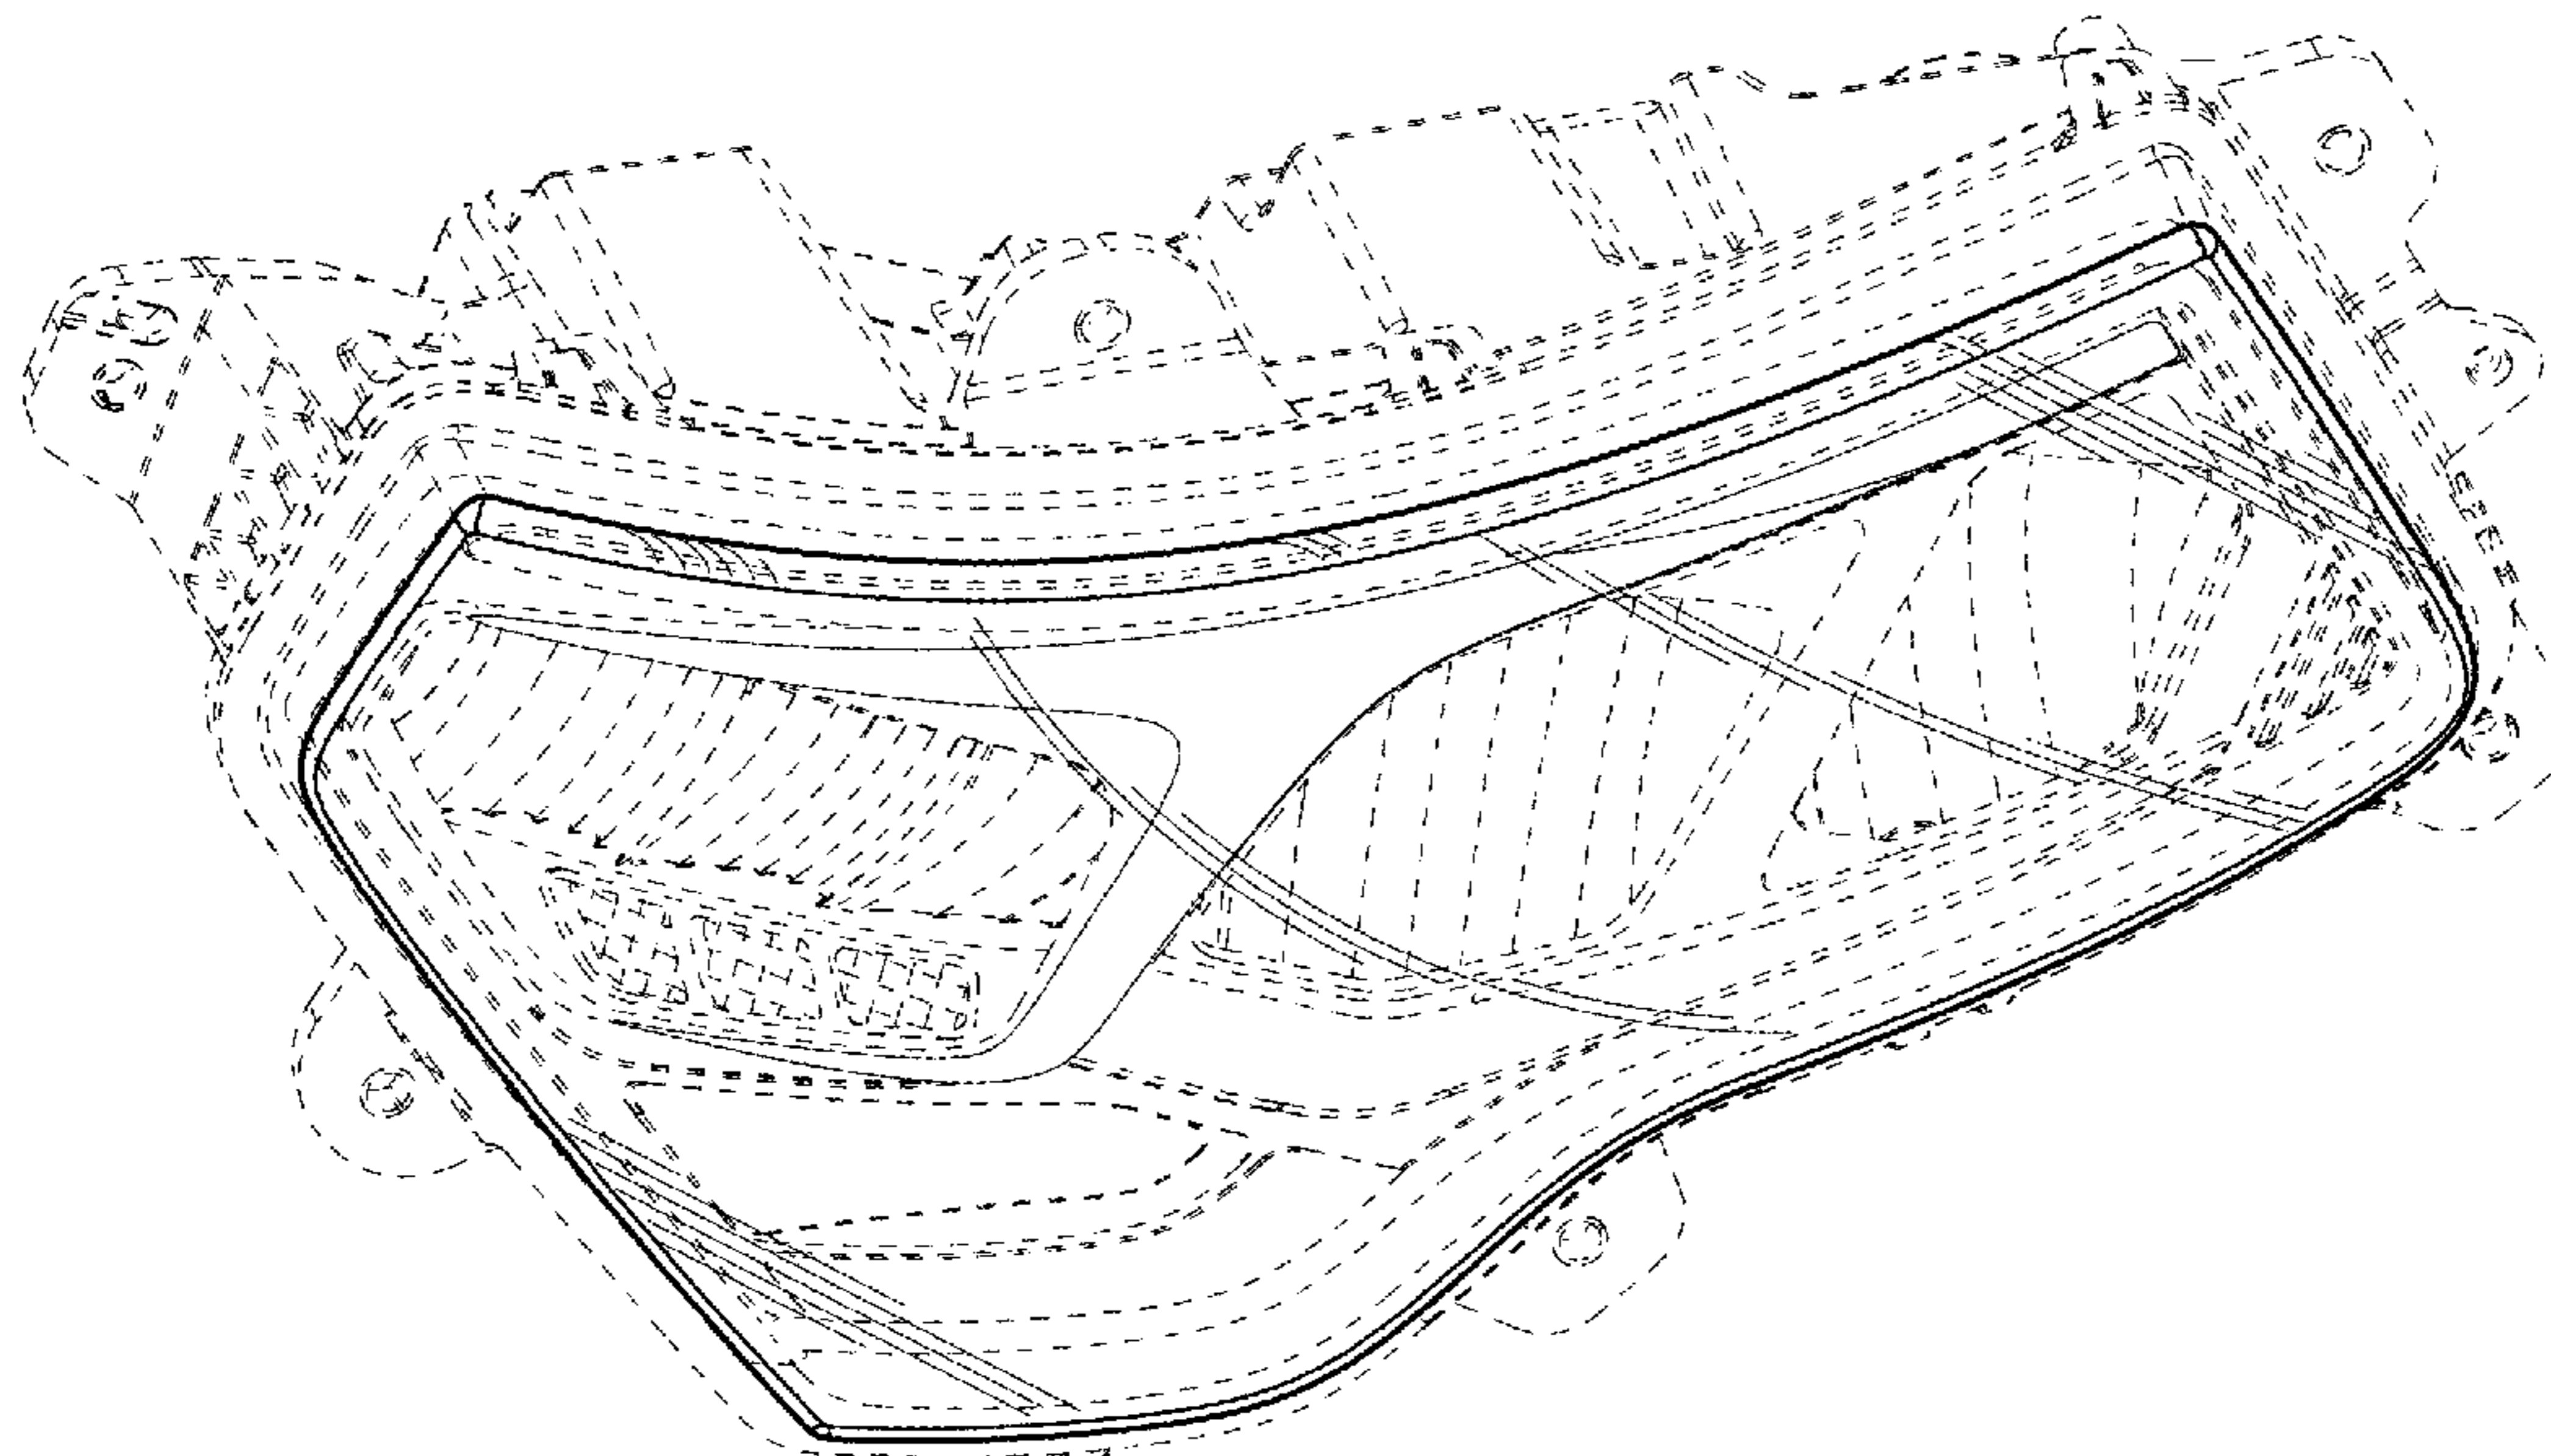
is a bottom view of the lighting device illustrated in FIG. 1.
